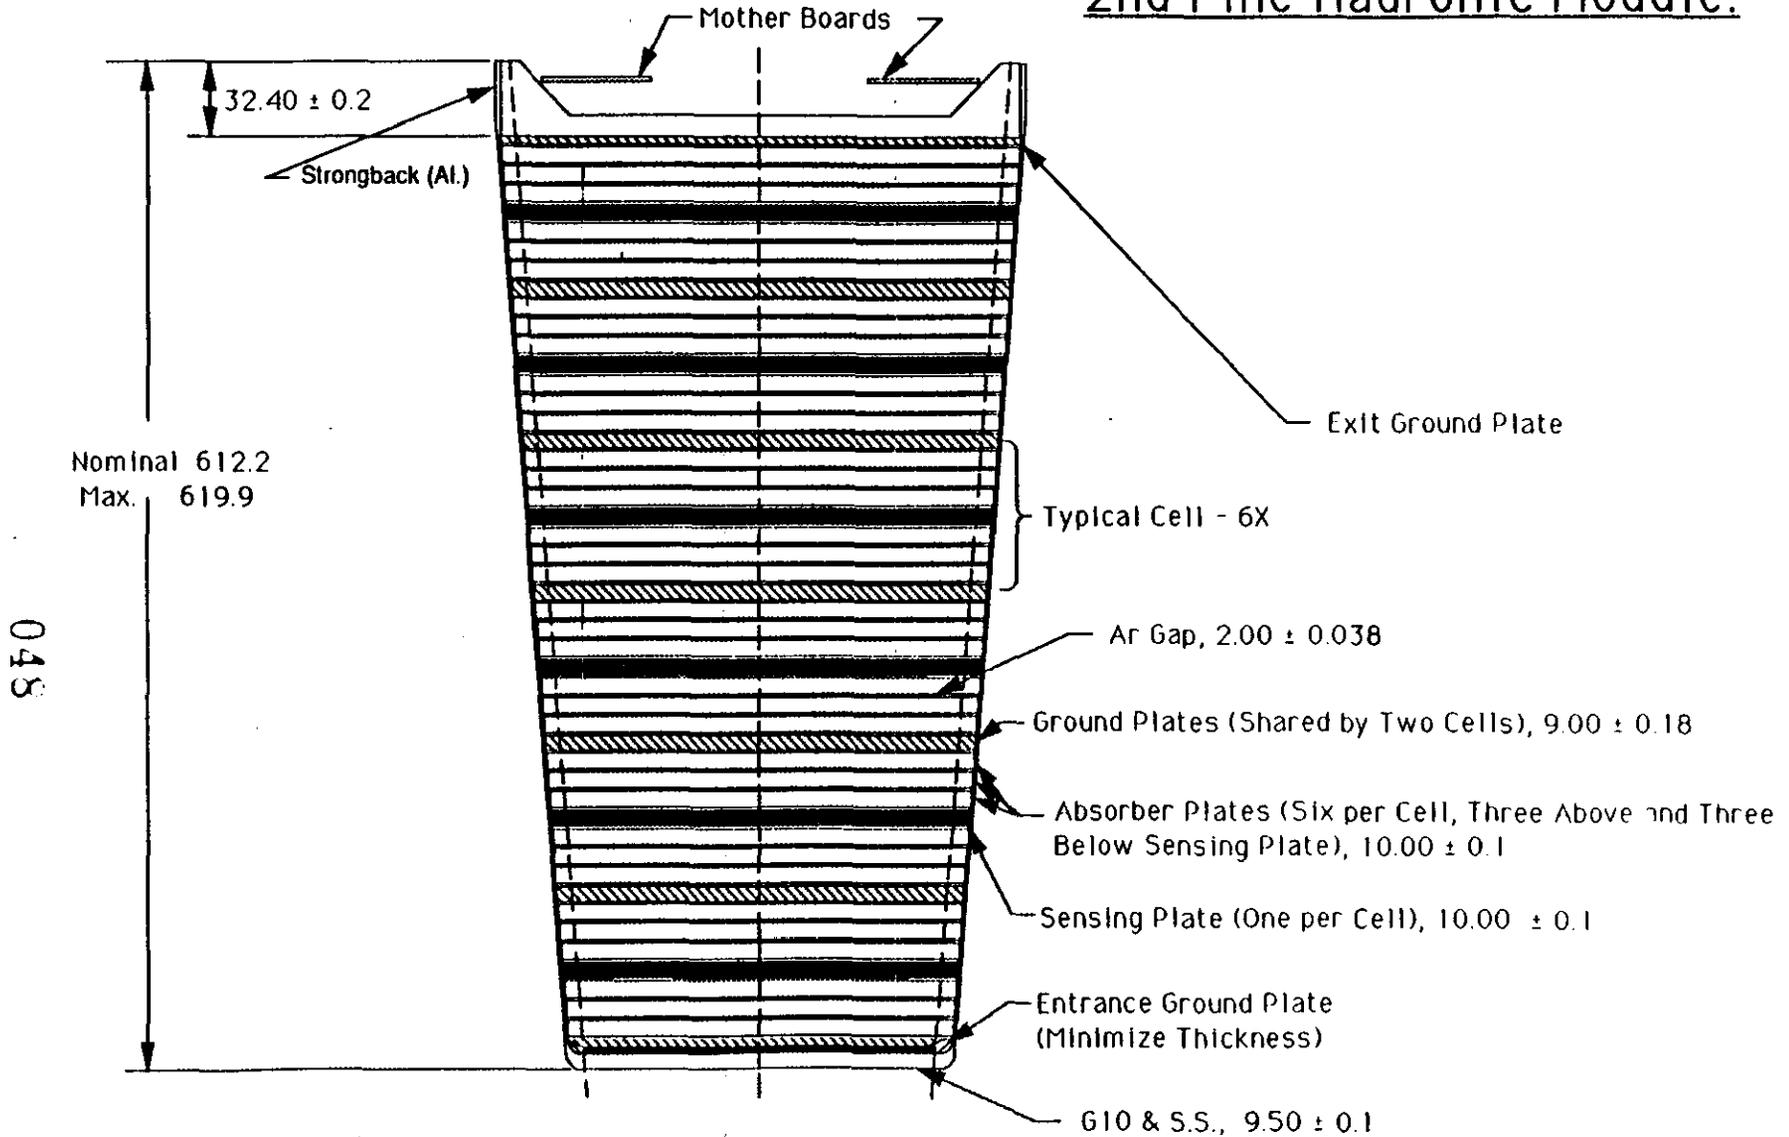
Second Fine Hadron Module Showing Stack Height and Element Tolerances
